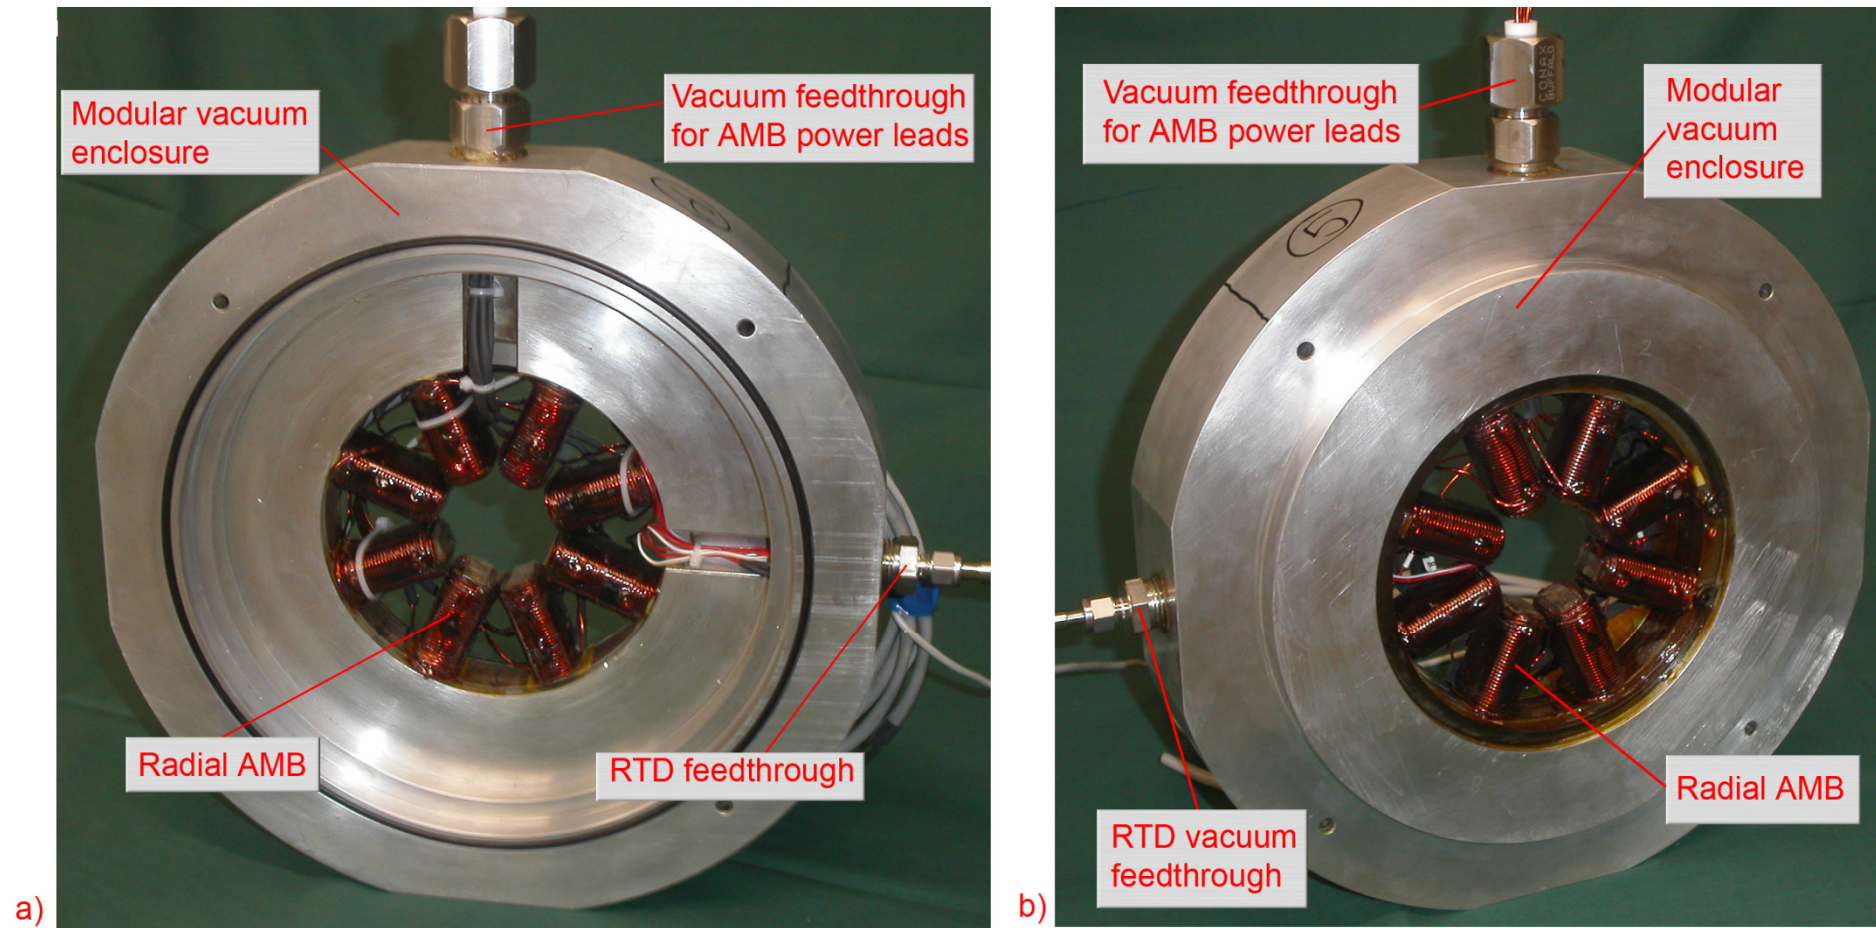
(a) Bottom AMB final assembly (b) Top AMB final assembly
